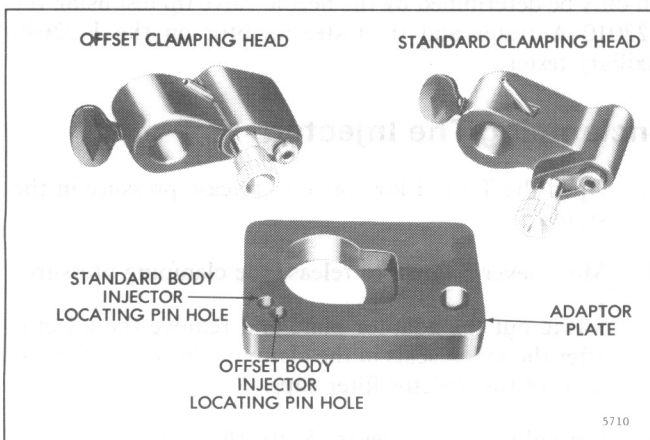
Injector Tester J 23010-A Clamping Heads
